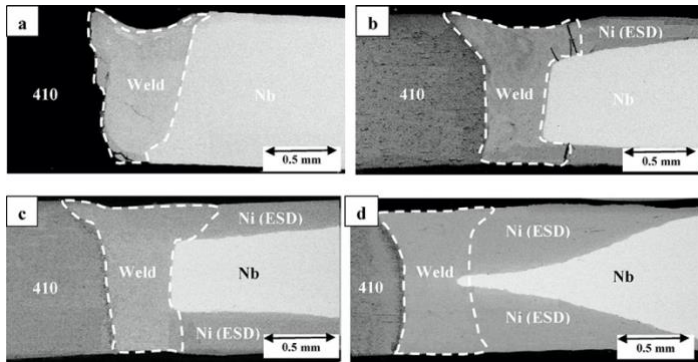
Cross section of dissimilar laser weld of Nb to 410 steel with different nominal ESD interlayer thicknesses, a- No interlayer (cracked), b-0.25 mm thick (cracked), c-0.5 mm thick, d-1 mm thick.
